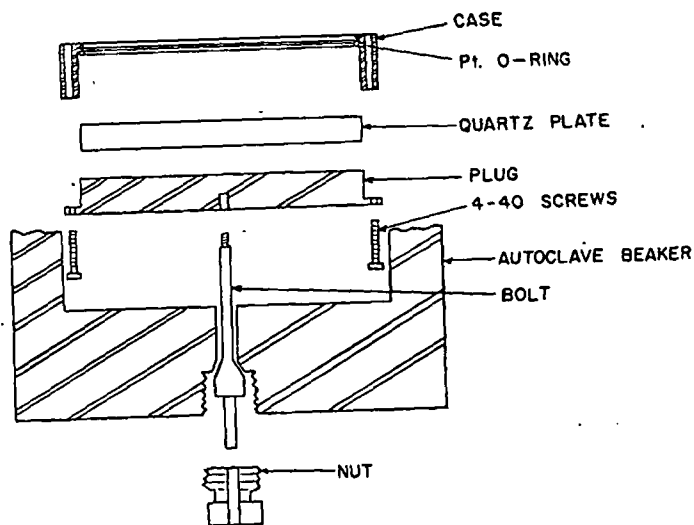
Exploded view of the stainless steel holder and its disposition in the autoclave.
